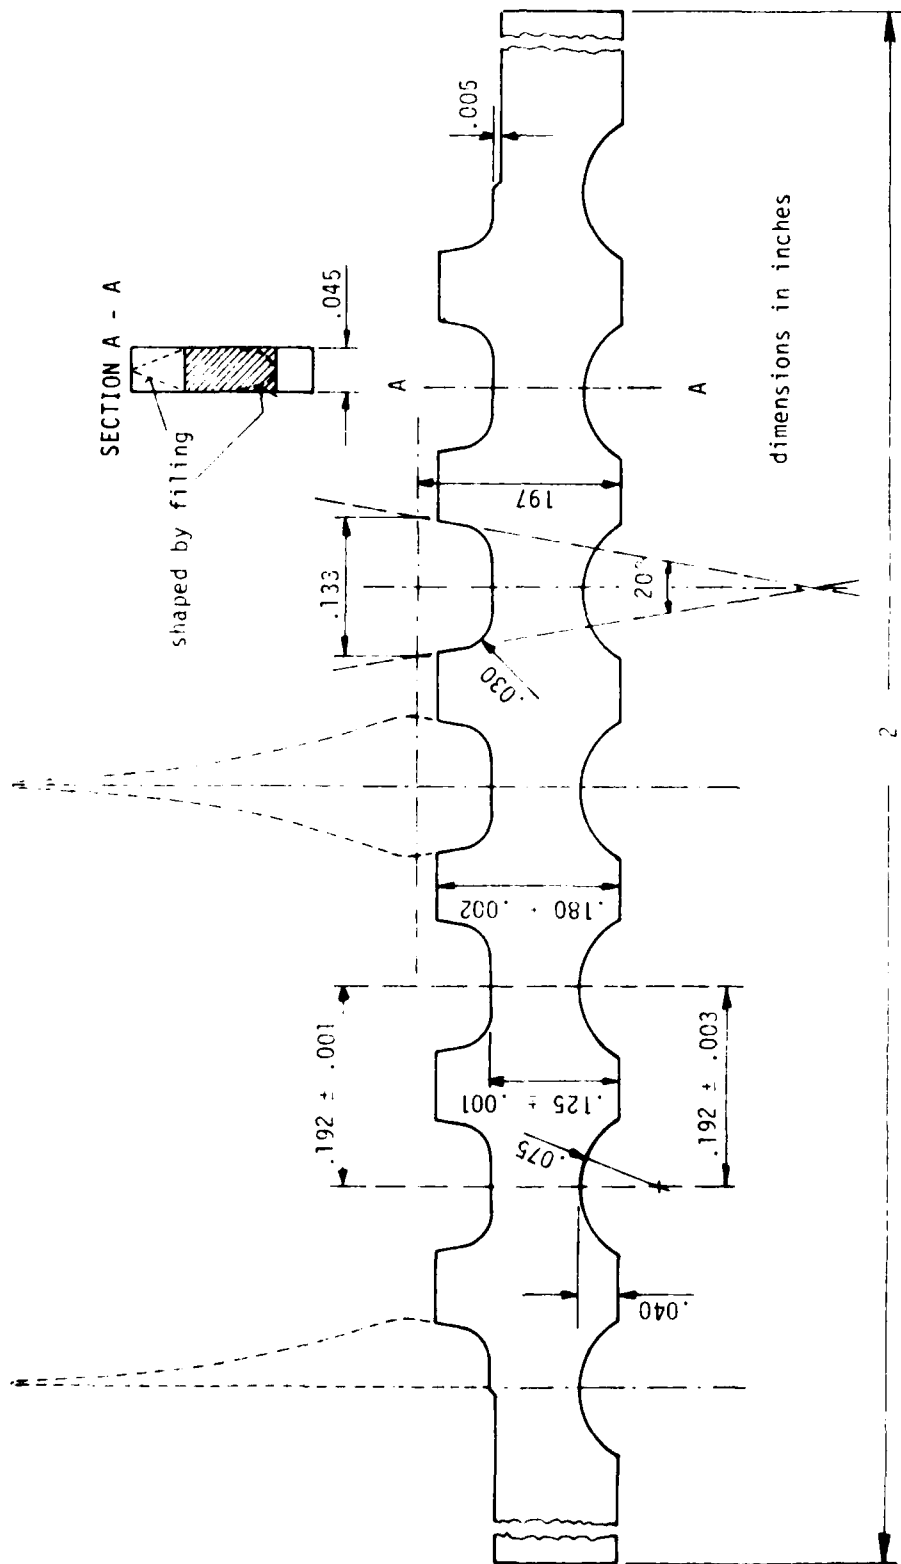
Nozzle Ring Spacer Drawing (Final Version)
